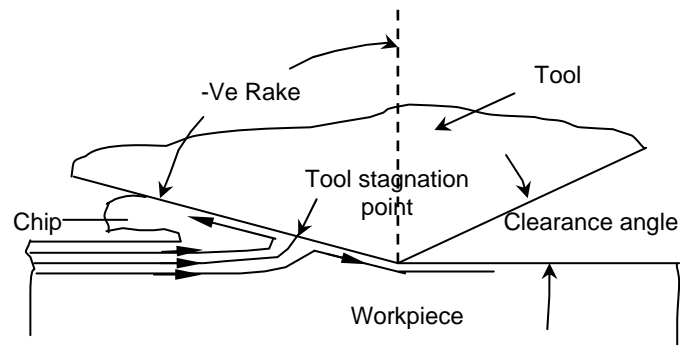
Mechanism of material removal in grinding with machining with high negative rake tools.
